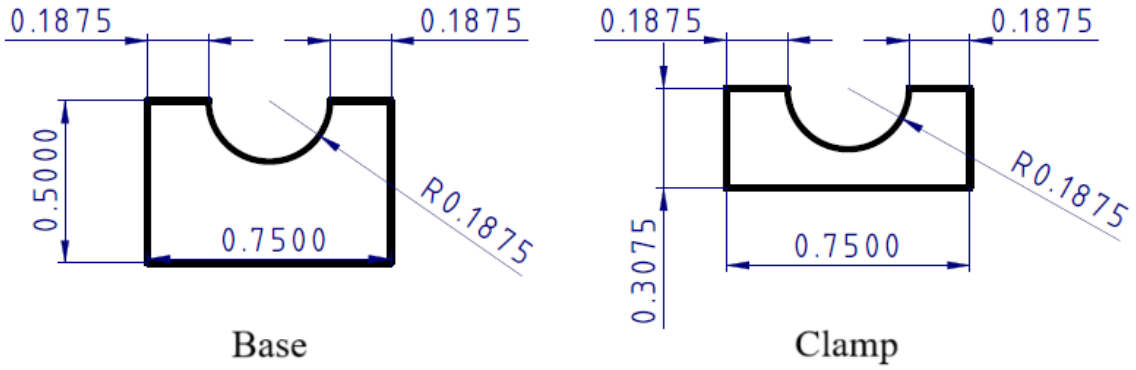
Cross-section of the bracket base and clamp used to secure the screw rods to the SFIL (dimensions in inches).
